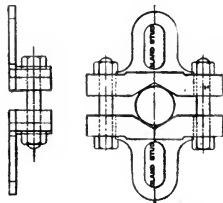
Clamp for Repair of Broken Connecting Rod.
